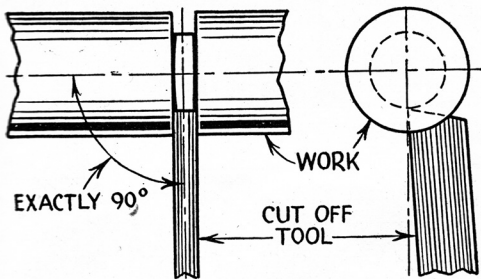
Setting the cut-off tool into the work. The blade must be at a right angle to the work and the point should be on the exact center line.
